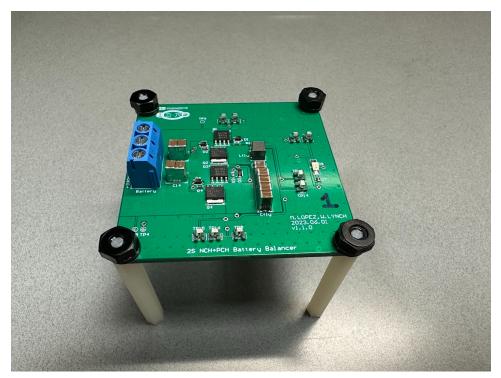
2S NCH+PCH Balancer PCB Top View
